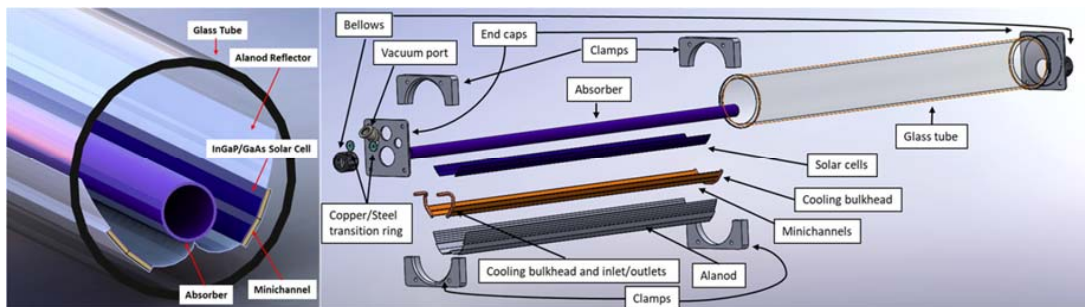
Hybrid receiver design (left) and exploded view of components (right)
